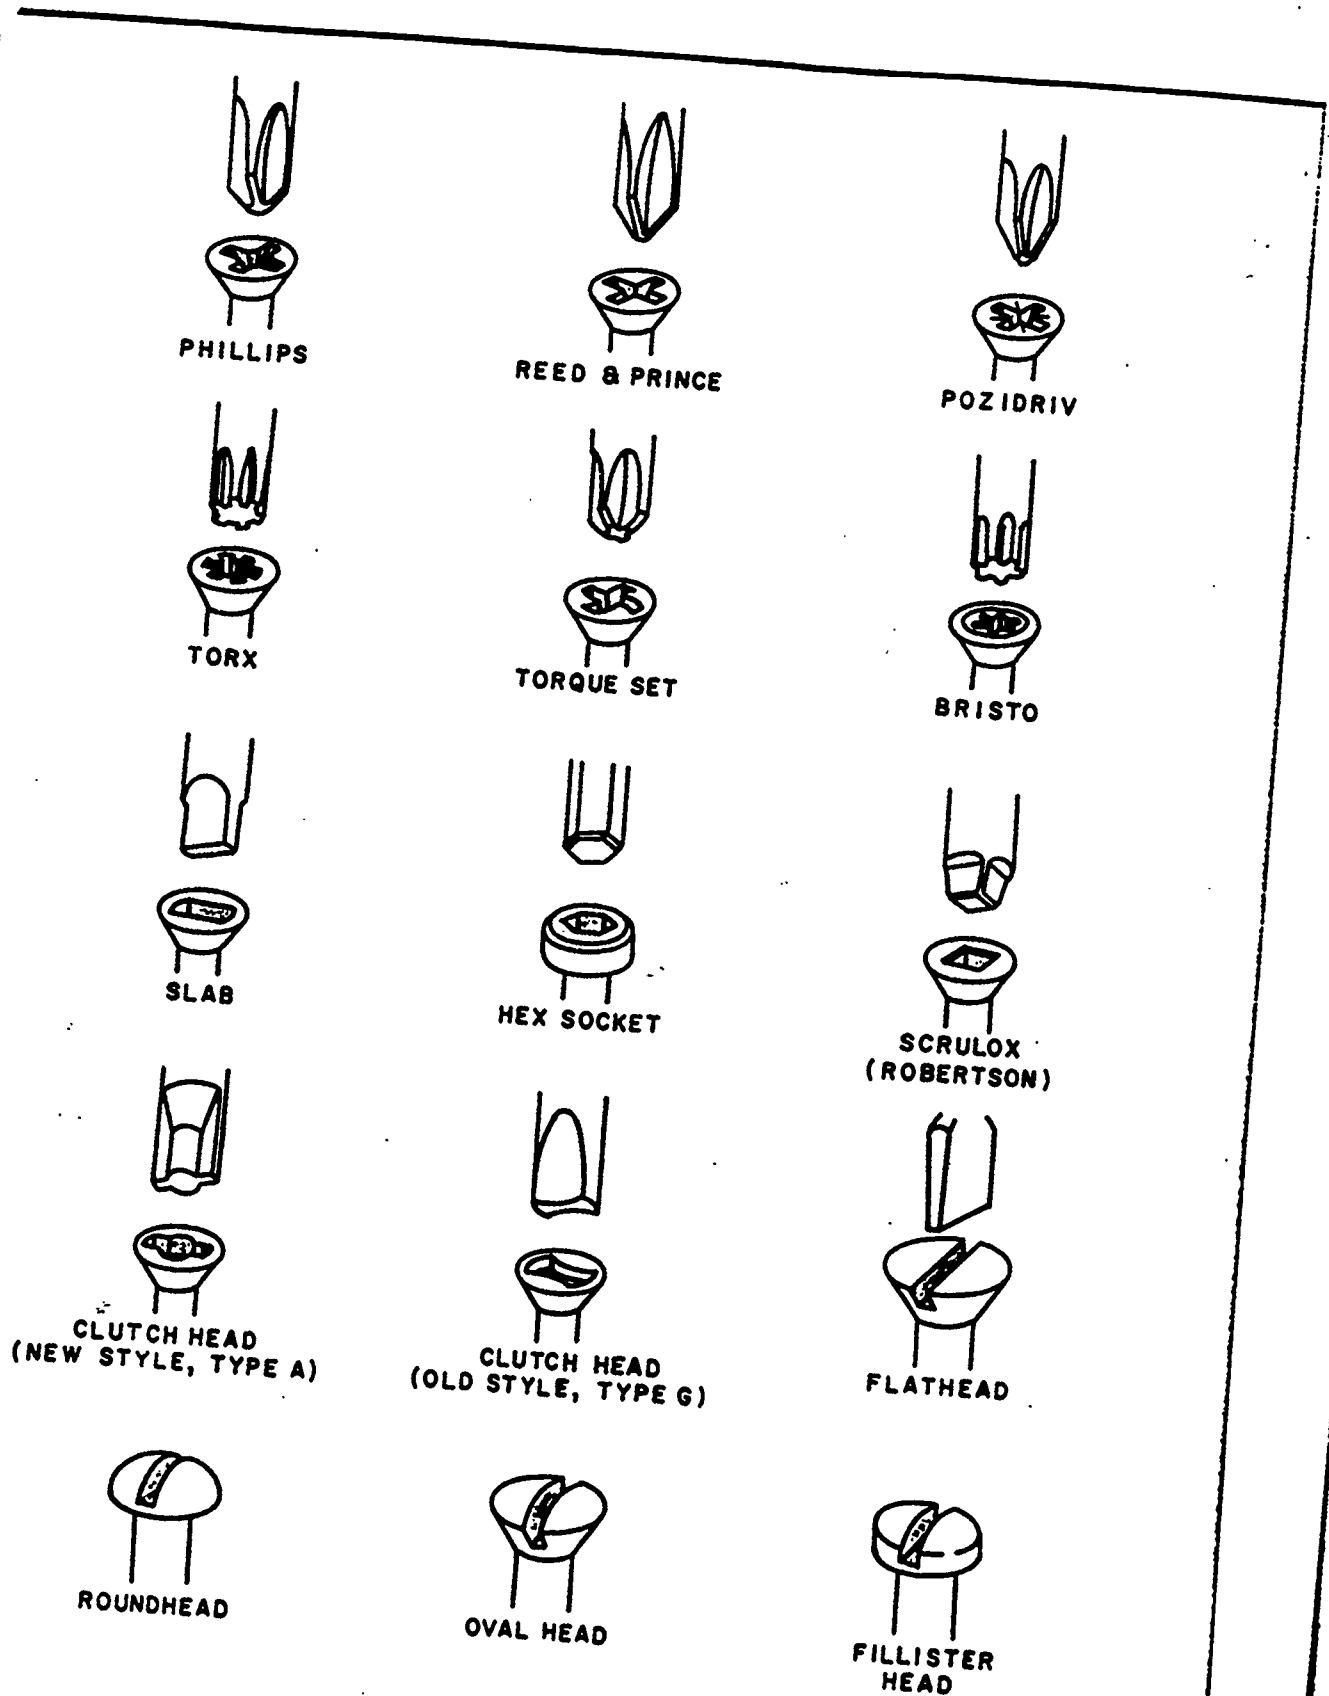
Typical screw head configurations. (The Hand Tool Institute)
